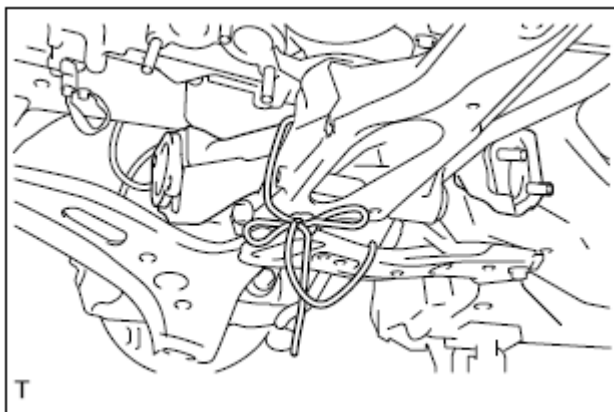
Tying Exhaust Pipe Sub-Assembly FR To Front Suspension Crossmember Sub-Assembly Using Rope
